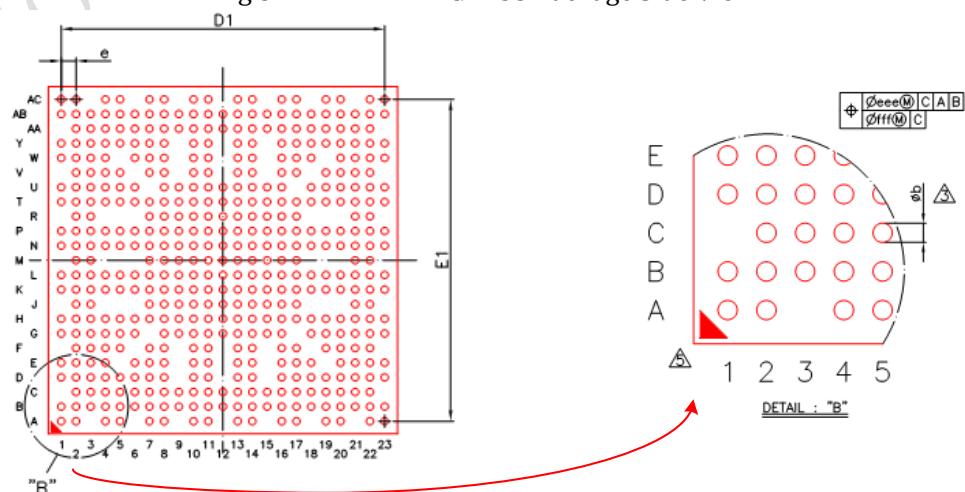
RK PX2 TFBGA453 Package Bottom View
